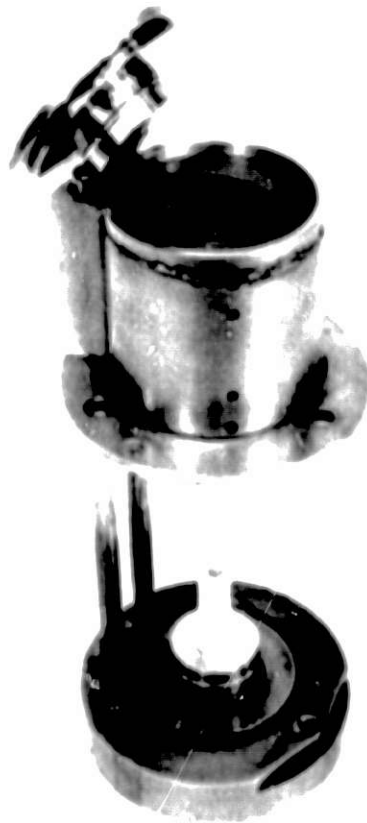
Isostatic Mold Assembly for Pressing Y_2O_3 Feedthrough Insulators.
